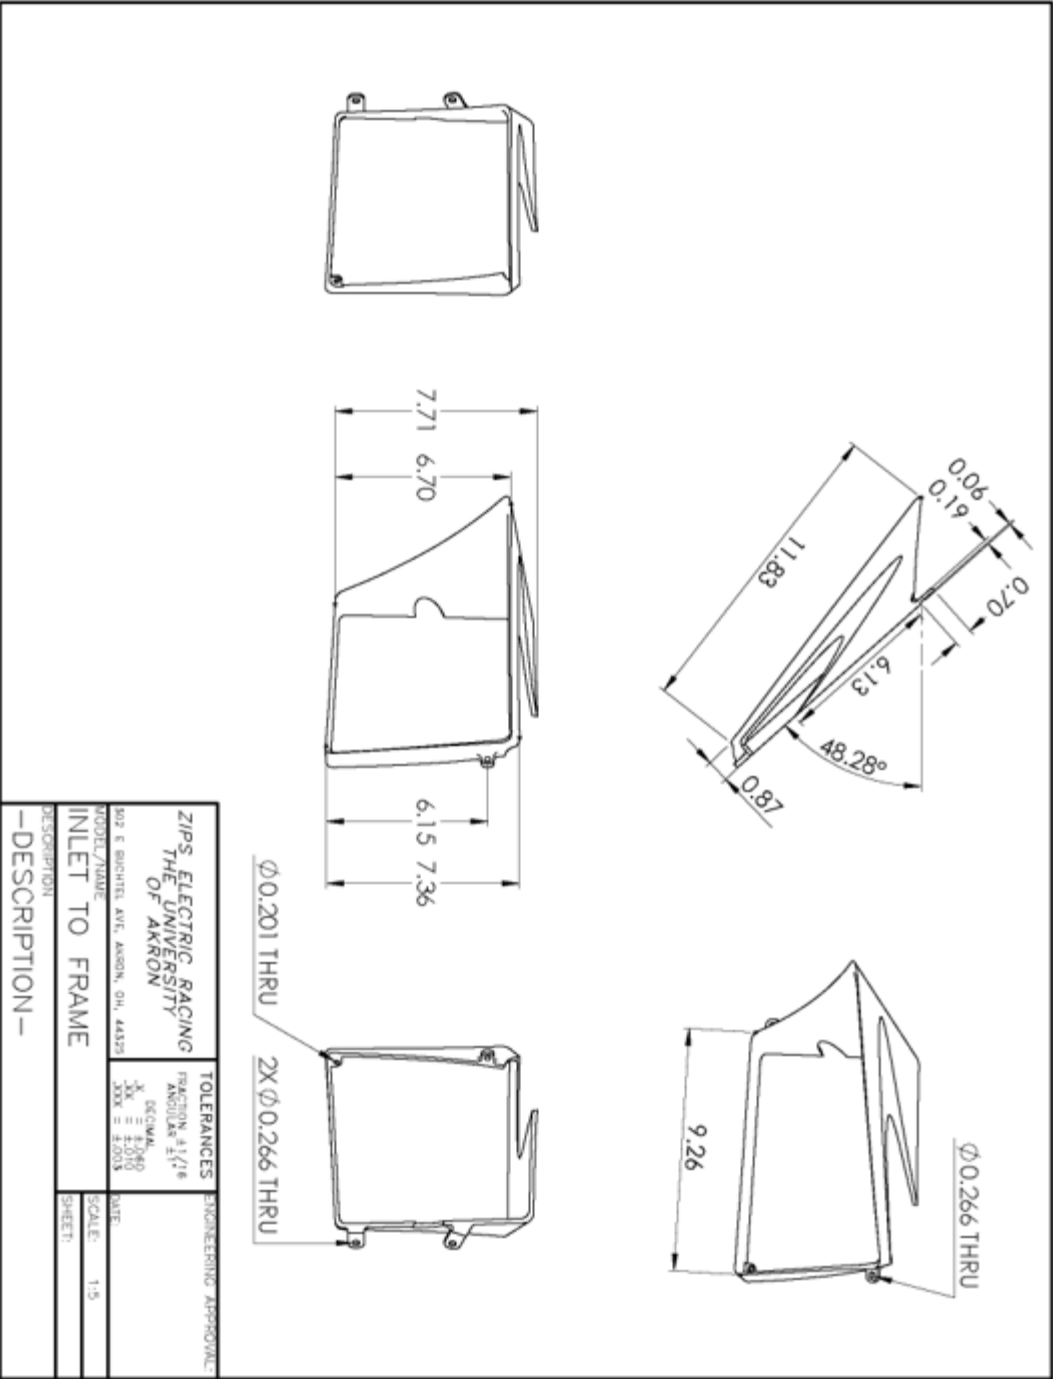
3D Printed Duct Piece that is the Beginning of the Air Ductwork
